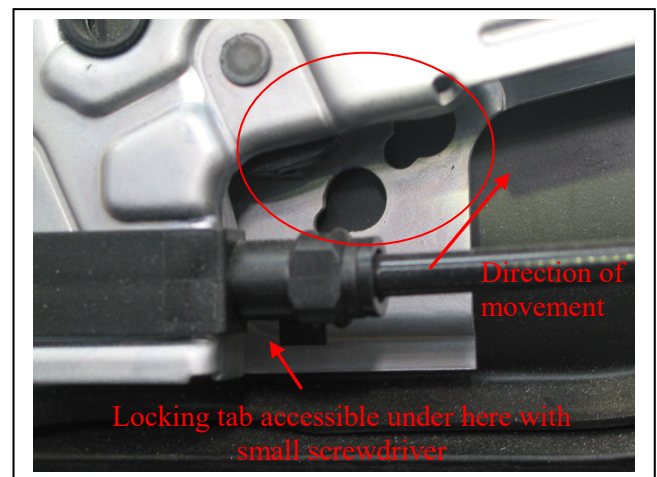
Locking area with micro switch removed. Slots are mounting points.
